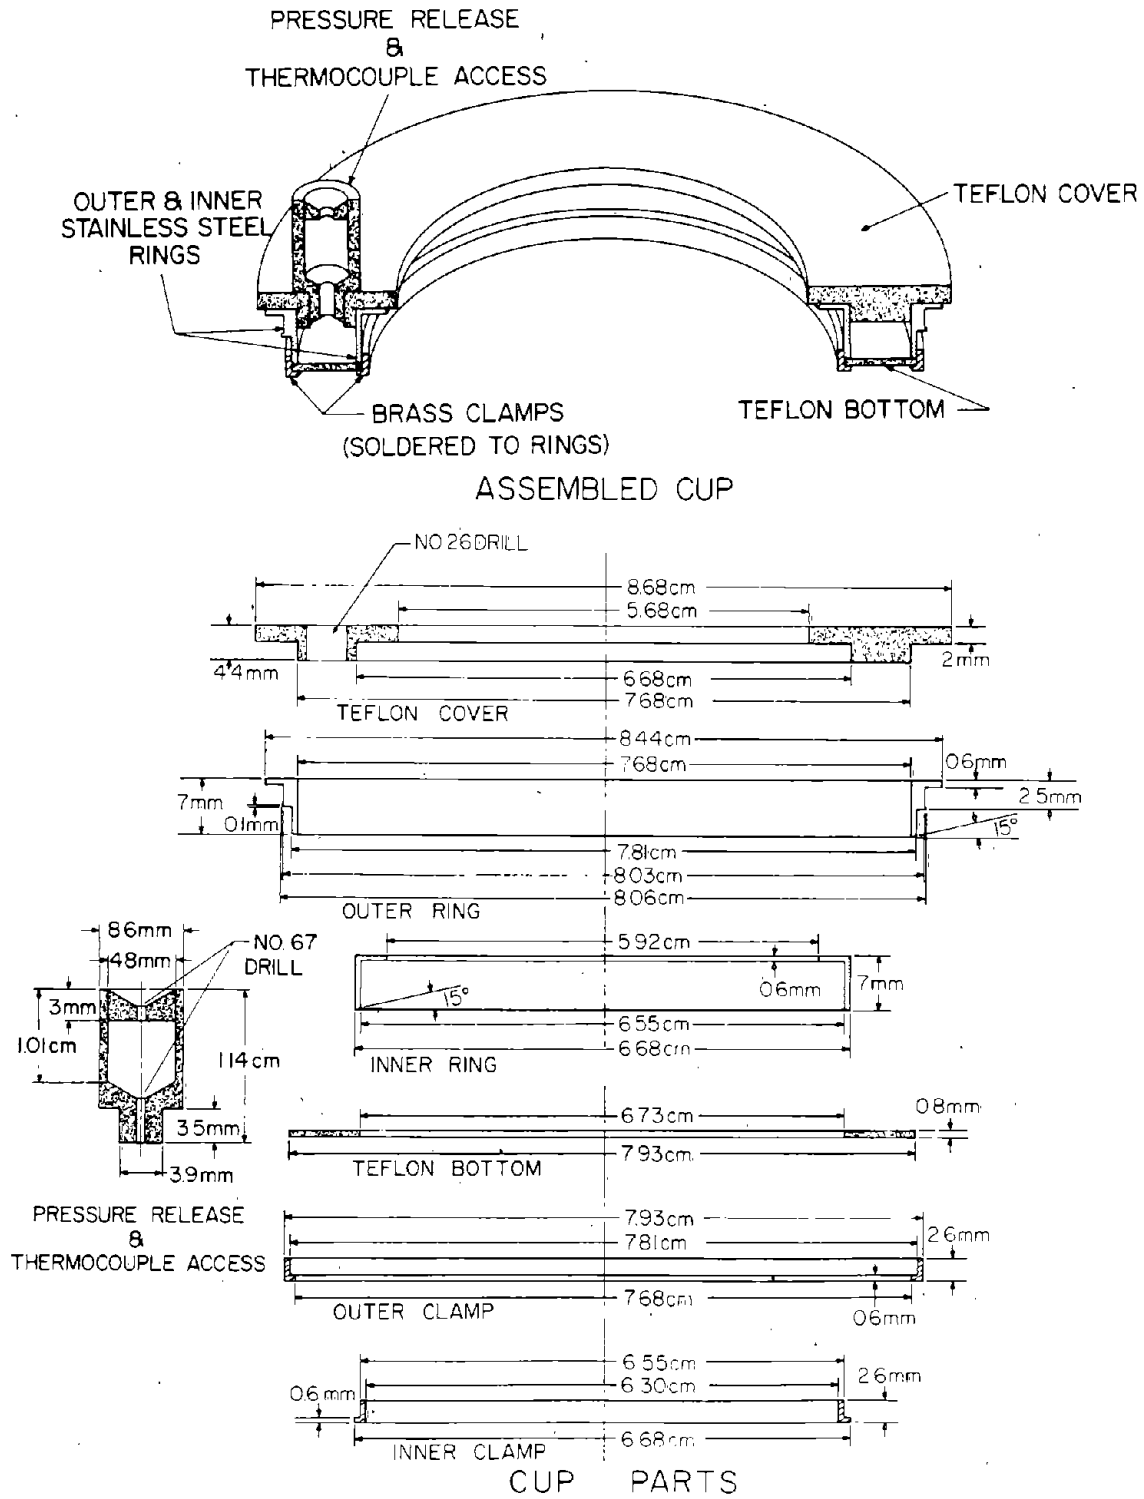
Cross section of assembled cell culture sample cup and exploded view of disassembled components
